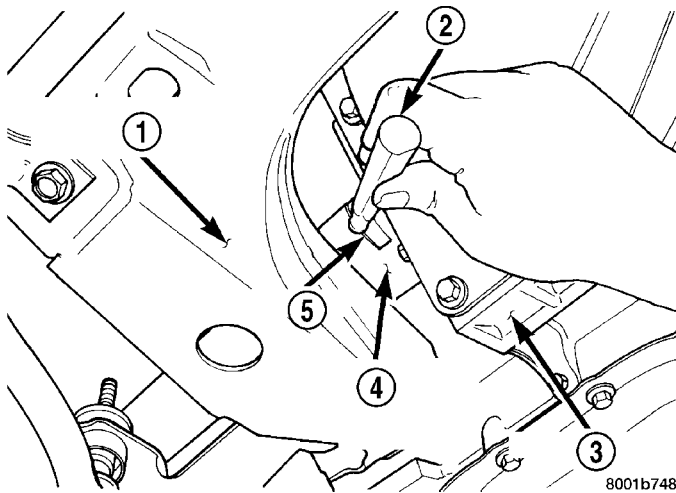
Disengaging Left Inner Tripod Joint from Transaxle
